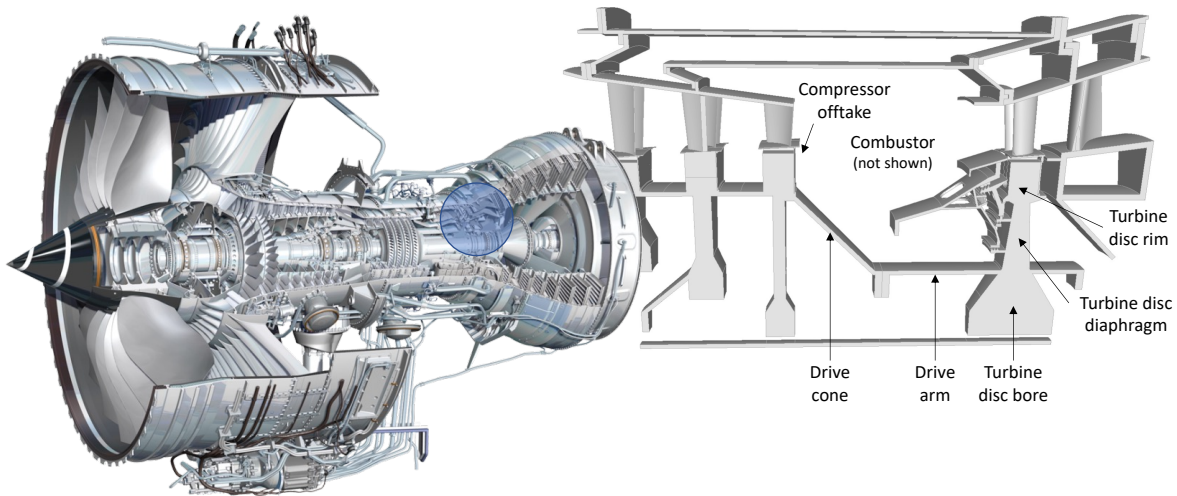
A typical gas turbine engine (left) and high pressure sub-system (right). The blue circle highlights the location of the high-pressure sub-system, which is comprised of a 3-stage compressor connected through a drive shaft to the turbine disc. The combustor (where the combustion process occurs) would be positioned between these components, but is not included in the diagram.
